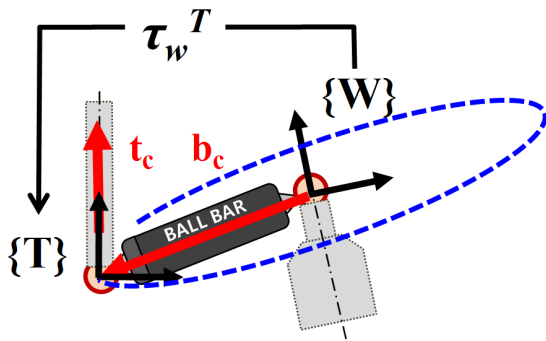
Ball bar vector and tool direction vector on 3D circular path for ball bar measurement
